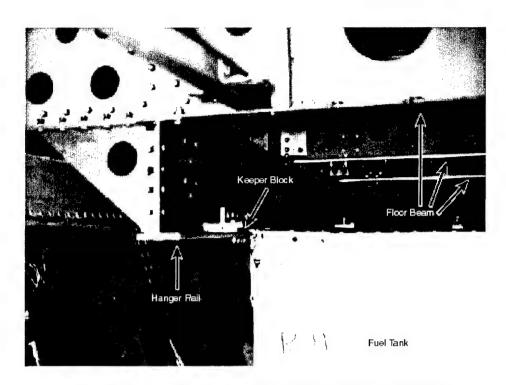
AUXILIARY FUEL TANK INSTALLATION
